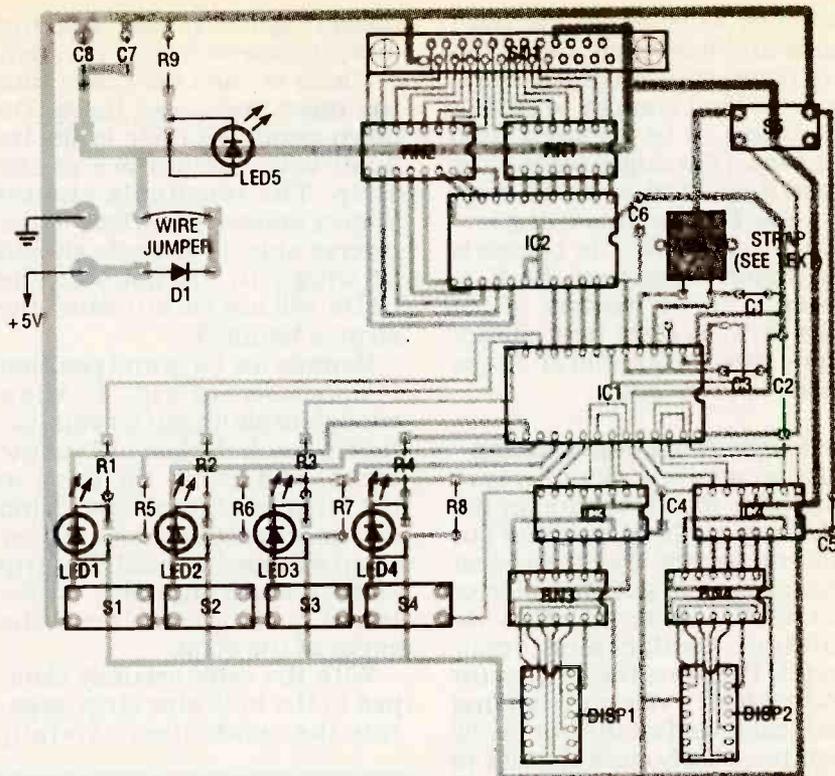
PARTS PLACEMENT DIAGRAM. Integrated circuits IC1 to IC4 are mounted in sockets. Note wire clamping crystal XTAL1 case to board. A DC jack can be mounted in a drilled hole on the board (not shown).
